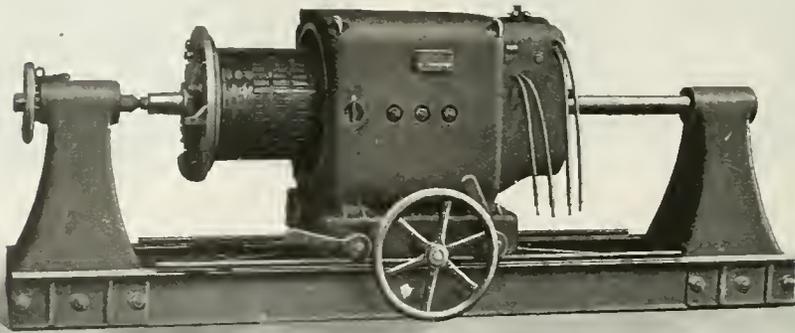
Frame-head bolts withdrawn and frame moved partially along the bed of the machine by means of the handwheel
